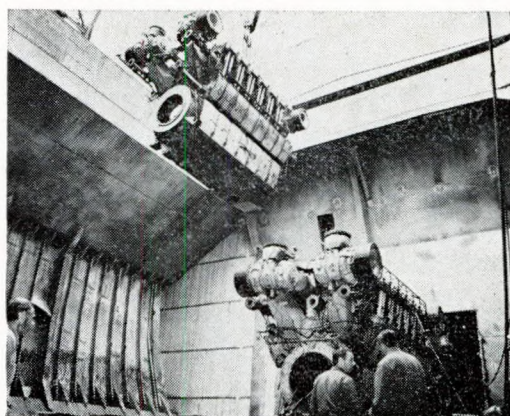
Removal of A.O. engine indicating relative size of engine and hold access
